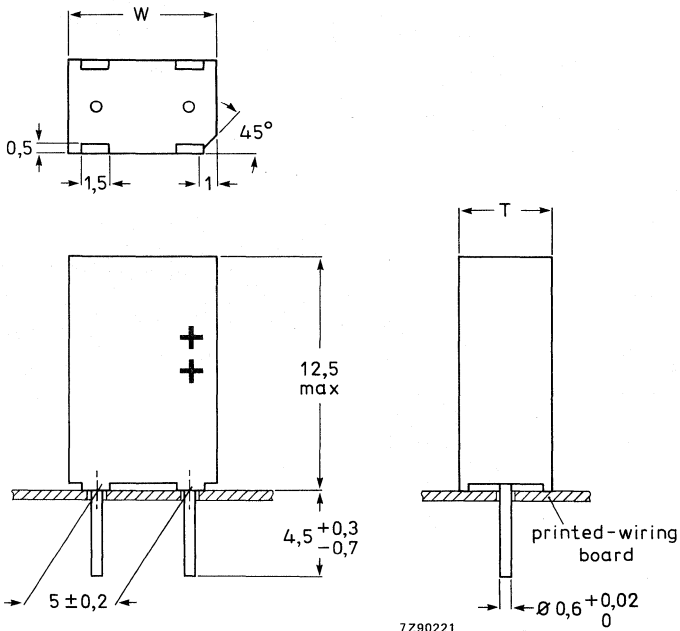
Style 1; see Table 1a for dimensions T and W.
